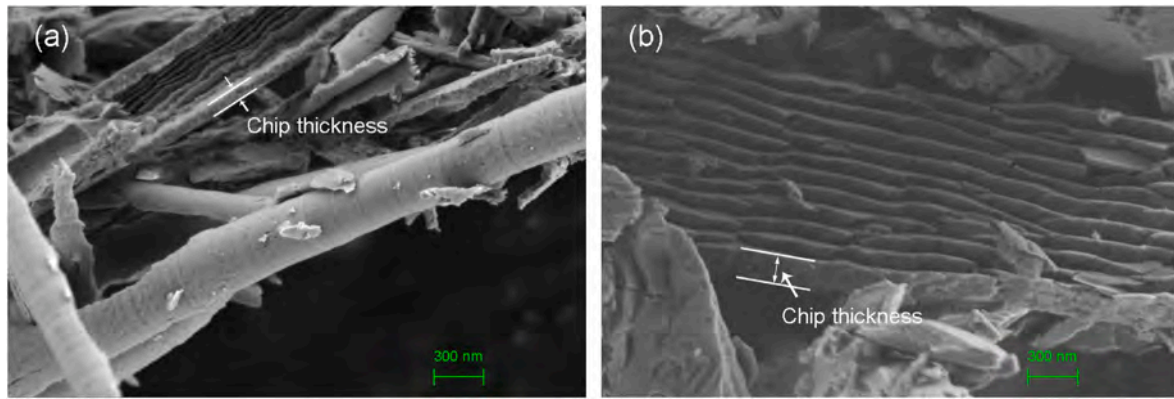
Close-up views of (a) needle-shaped chip; (b) flake-shaped chip.
